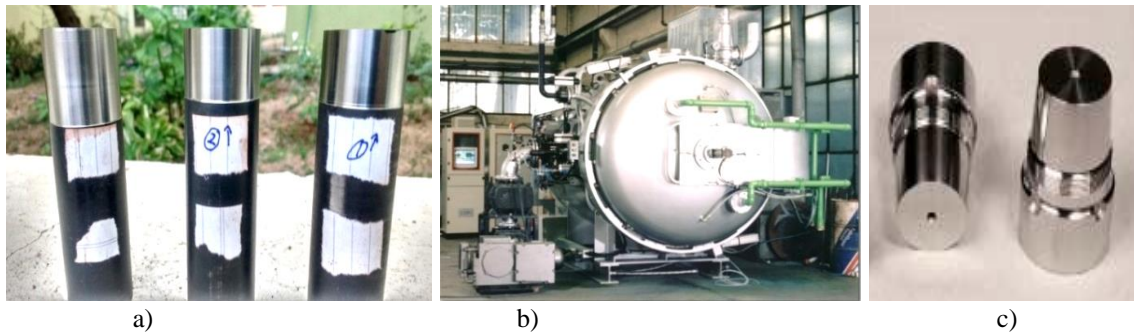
a) Air-hardened AISI D2 workpieces; b) COFI SPA Vacuum furnace; c) hard-turned AISI D2 punches [9]
